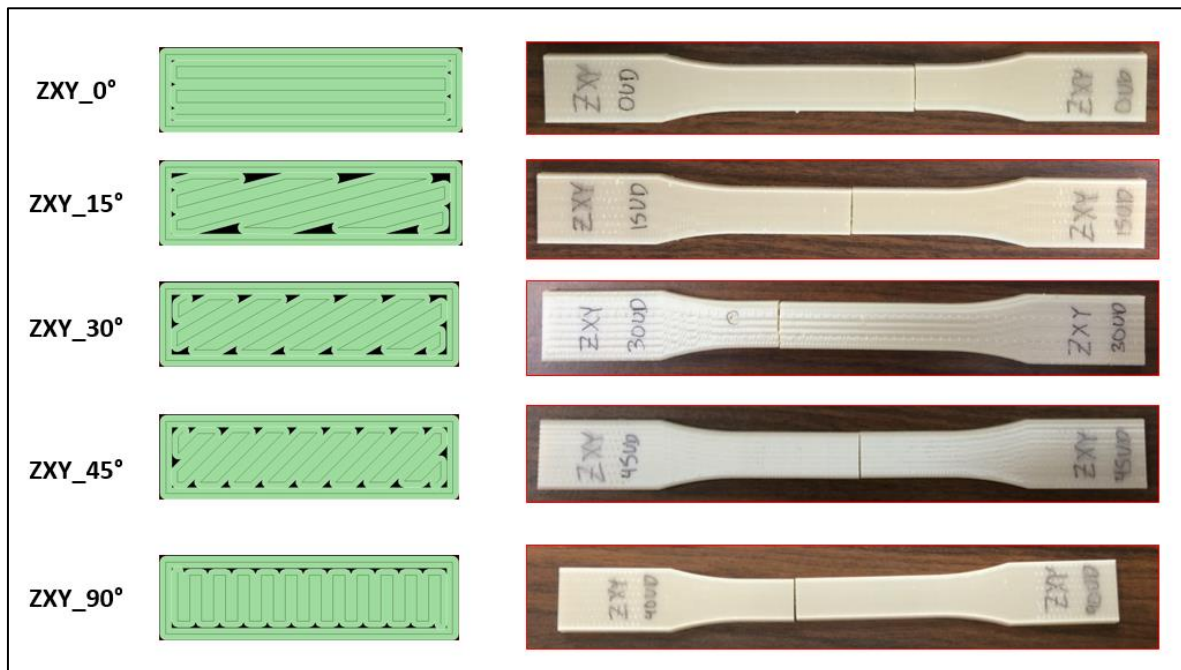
Cross Section and Failure pattern of 0°, 15°, 30°, 45° and 90° oriented specimen
